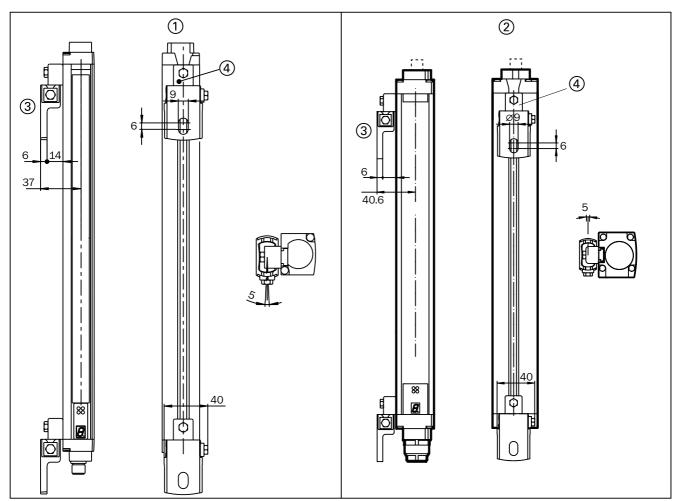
Dimensional drawings and mechanical detail of the side brackets (sender; receiver is mirror-image)
